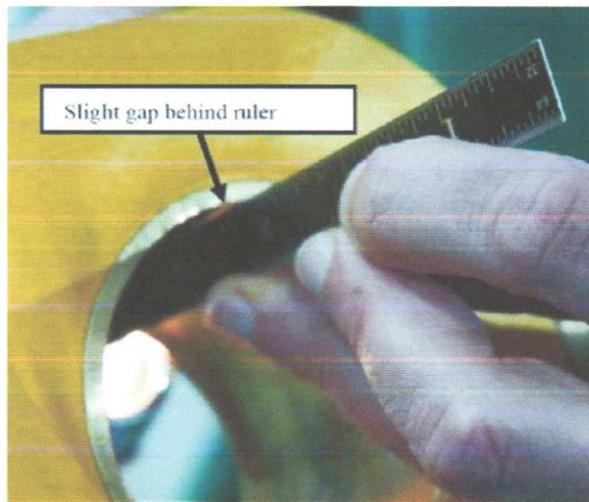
Inspecting Interior Surface of the Trunnion
